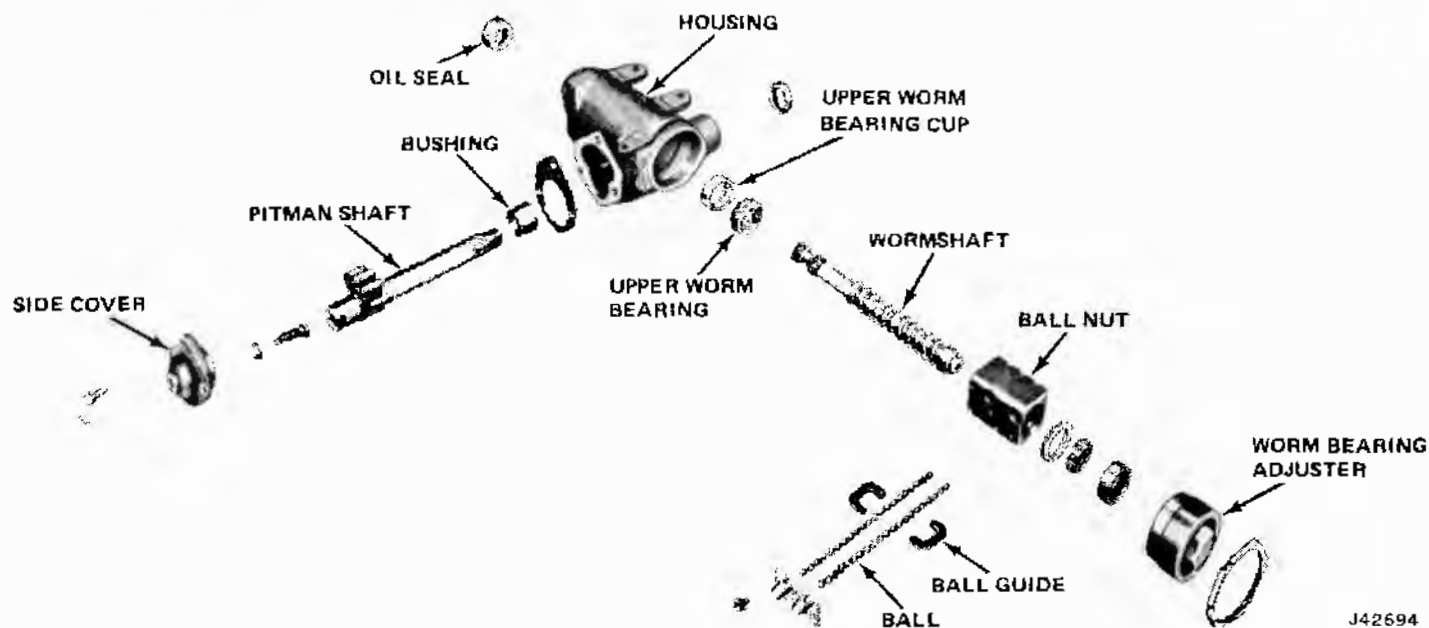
Left-Hand Drive Manual Steering Gear
